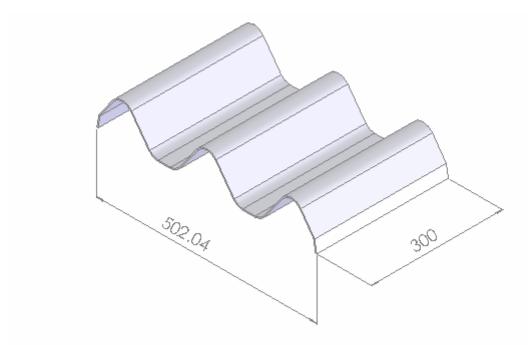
Thrie Beam Rail Backplate (shown without bolt holes) – dimensions in millimeters
